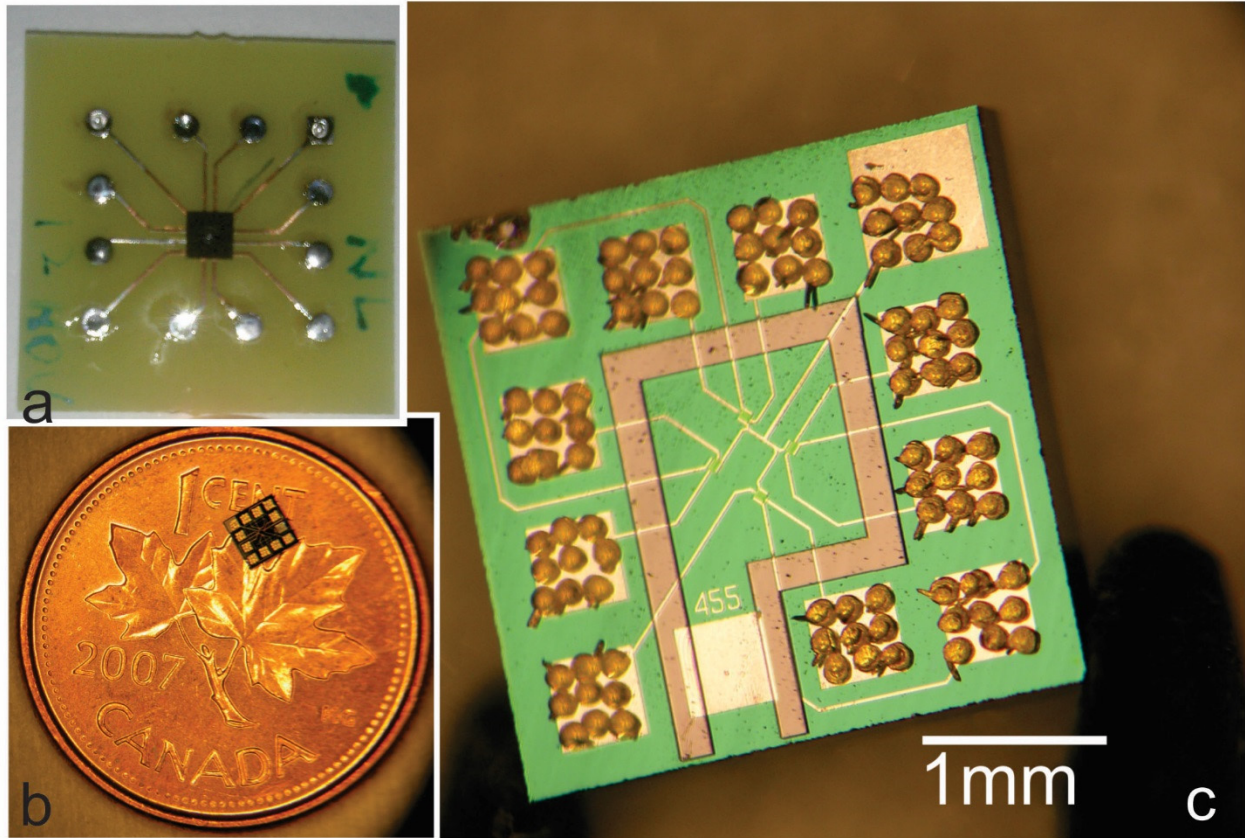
Packaged multi-axis sensor and its footprint (a: packaged sensor; b: sensor on a penny; c: sensor with gold bumps) © [2018] IEEE
